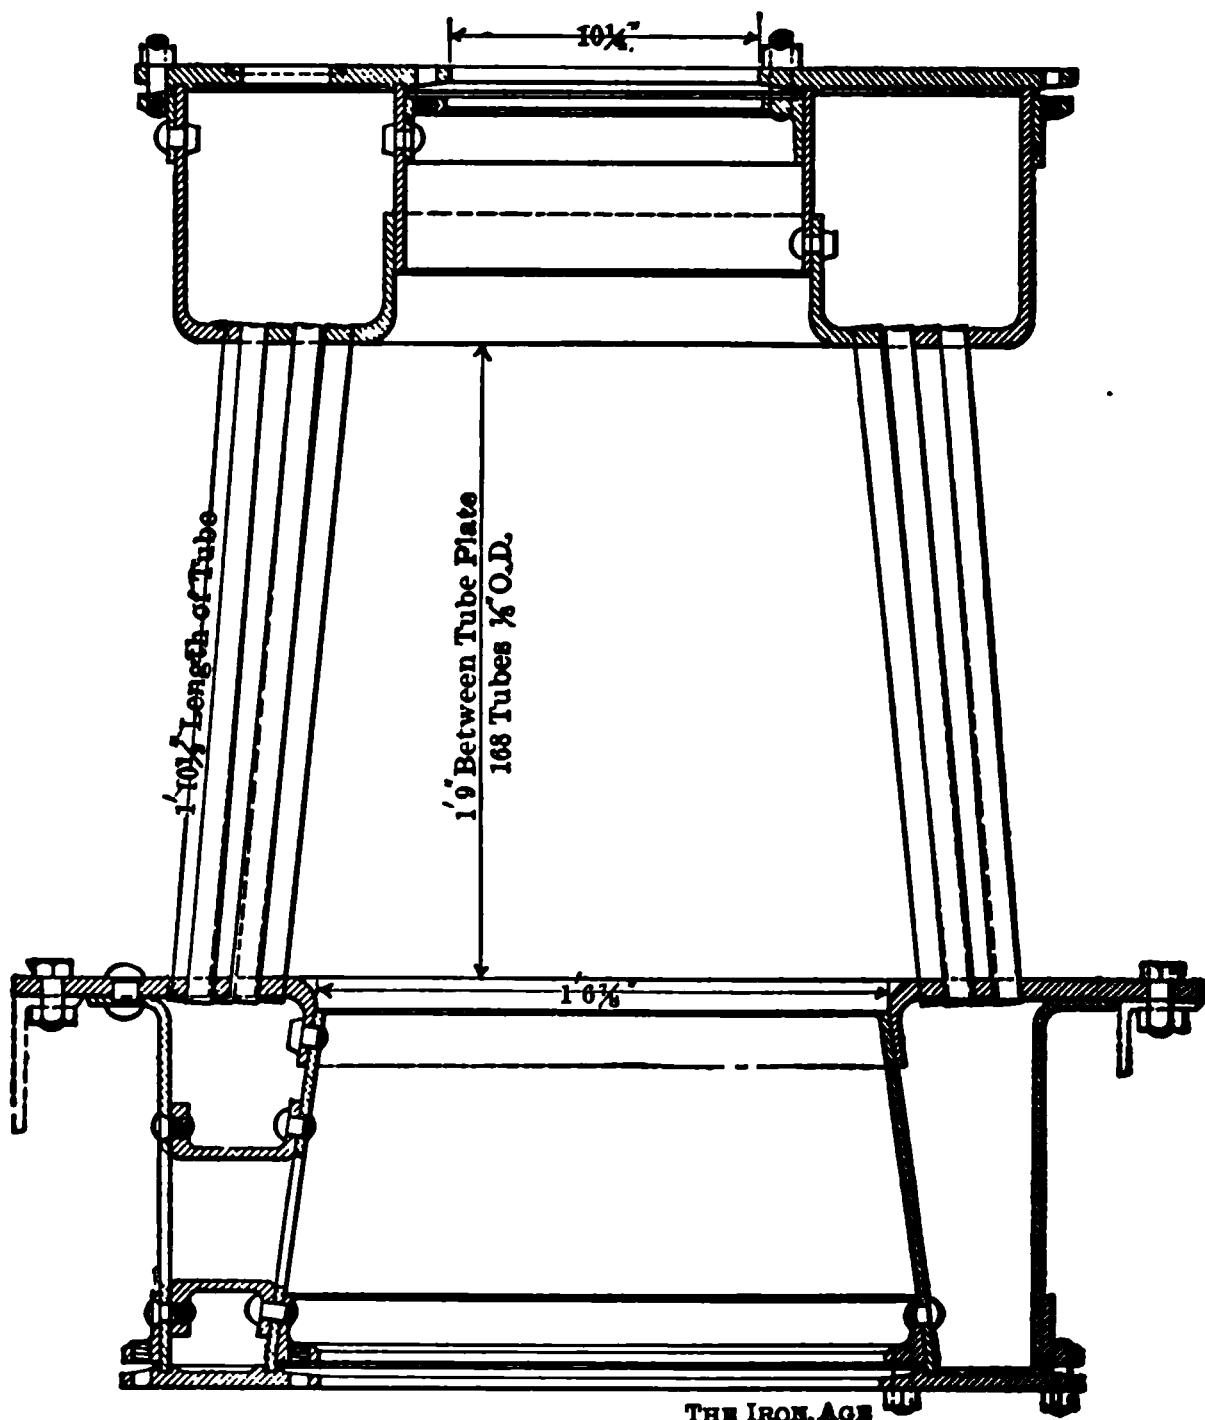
The Thornycroft Steam Wagon Boiler.
